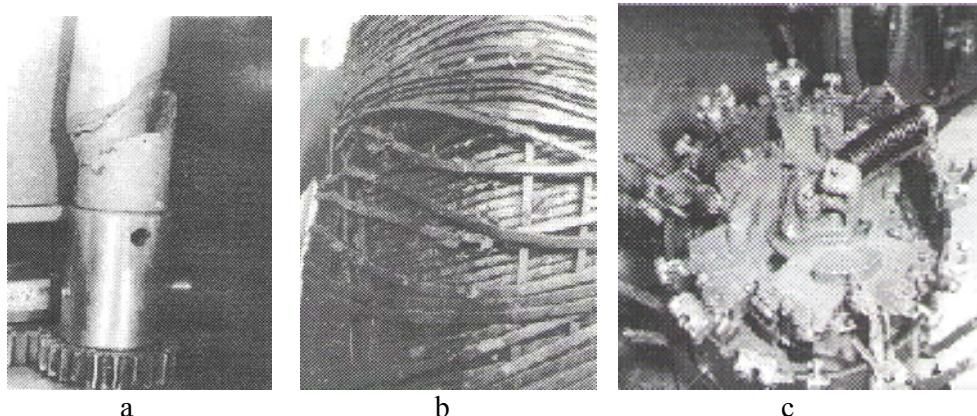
Damage to on-load-tap-changer [6]: a) Breaking rod drive; b) Effects of short circuit current on the windings; c) Destruction of resistors, and contacts broken
